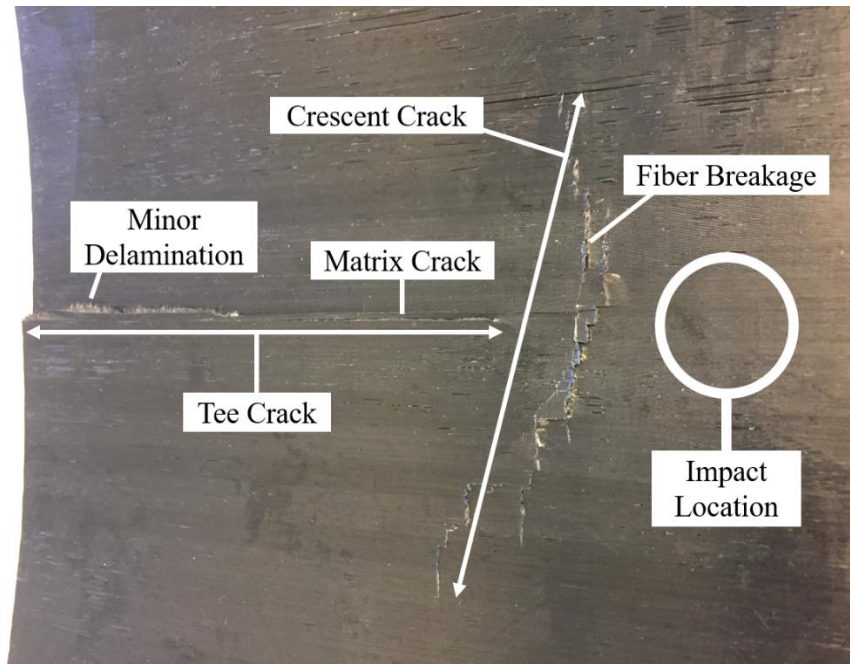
Photo of a typical crack pattern featuring the crescent crack and the tee crack.
